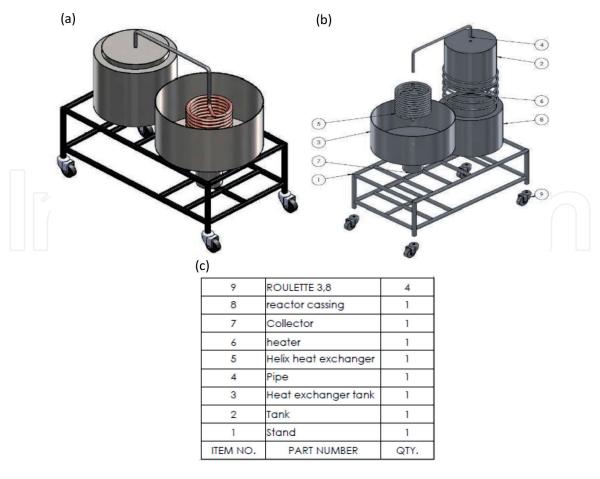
SolidWorks model of the heat exchanger (a) assembled heat exchanger (b) exploded view (c) parts list.
